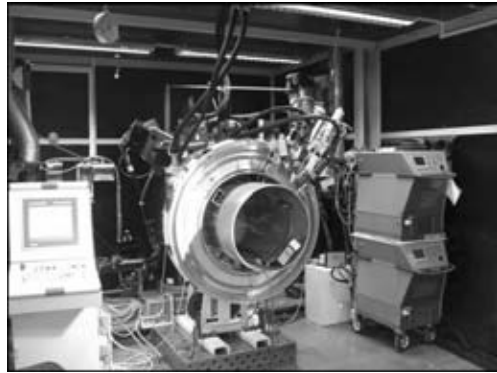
Specialized prototype of equipment for hybrid welding
